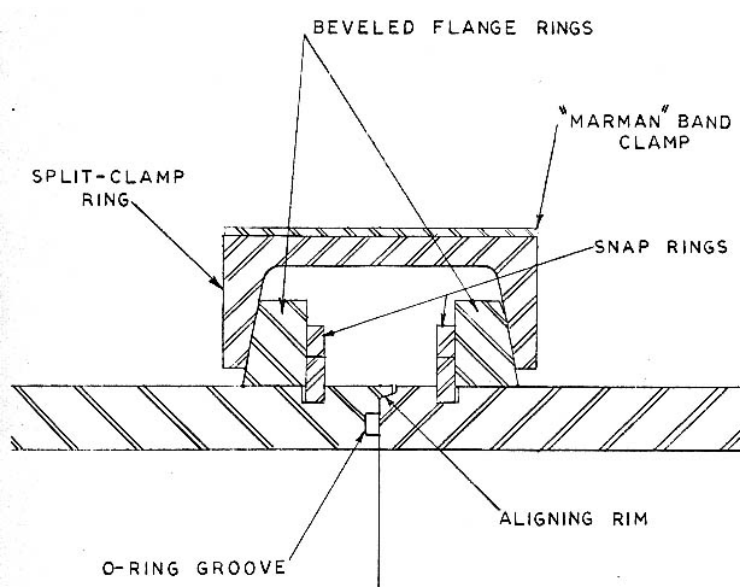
Sectional view of typical joint between two sections of the shock tube.
